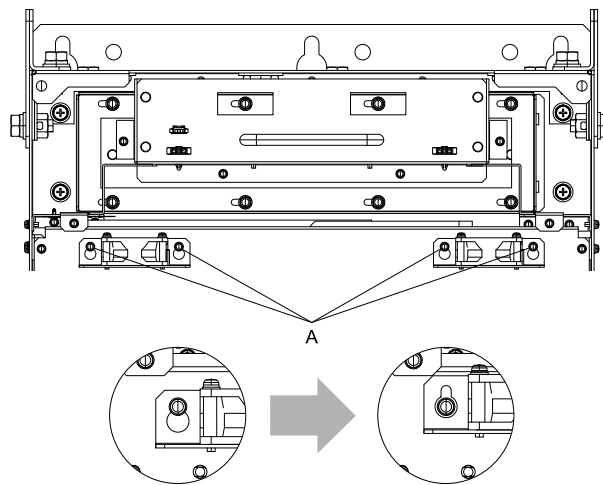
Slide the Circuit Board Cooling Fan Units
